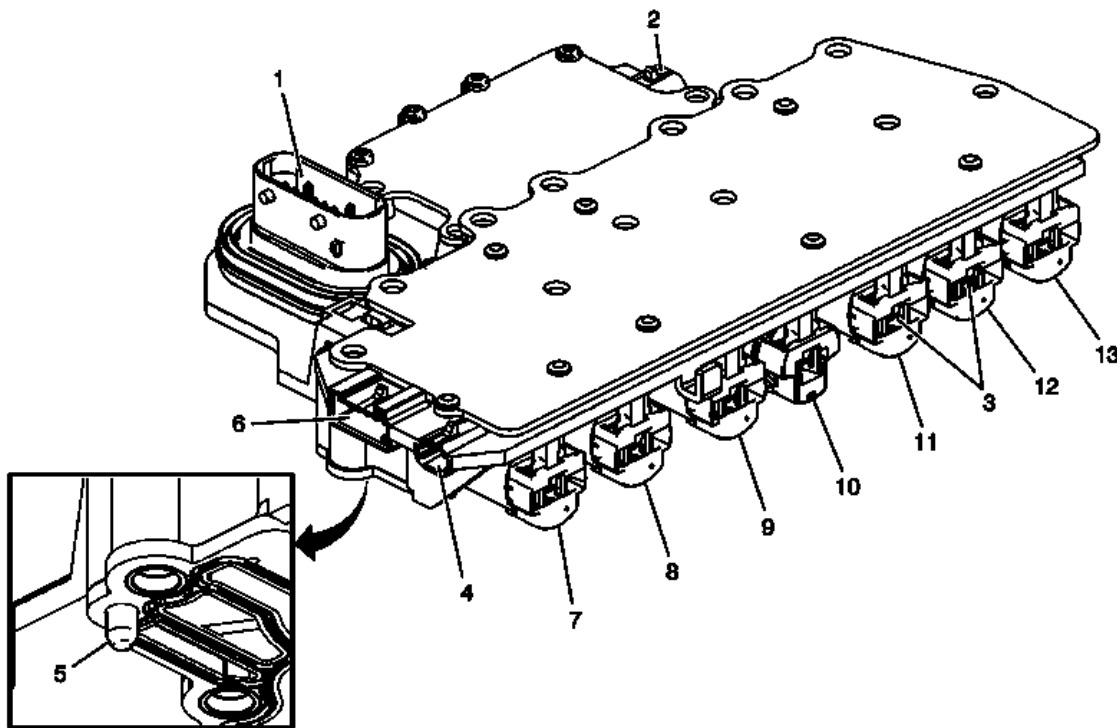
View Of Control Solenoid Valve & Transmission Control Module Assembly
